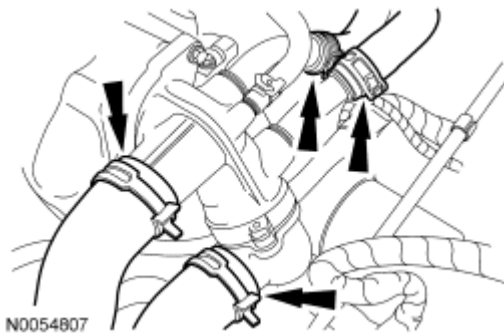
Locating Upper Radiator Hose, Lower Radiator Hose & Heater Hoses From Thermostat Housing
